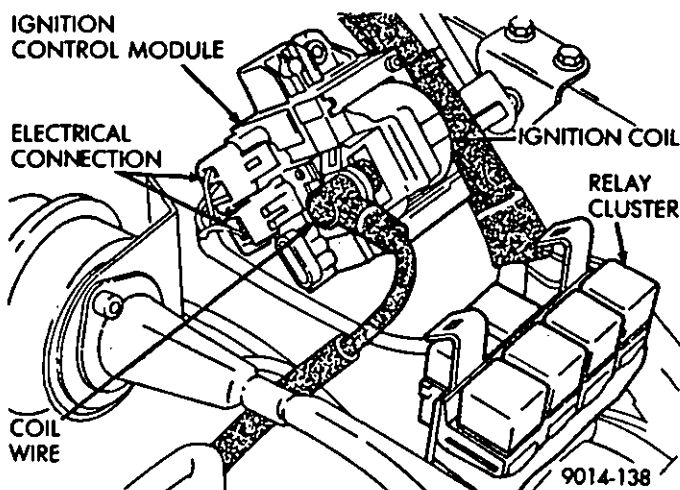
Engine Control System Relays, Ignition Control Module/Ignition Coil
